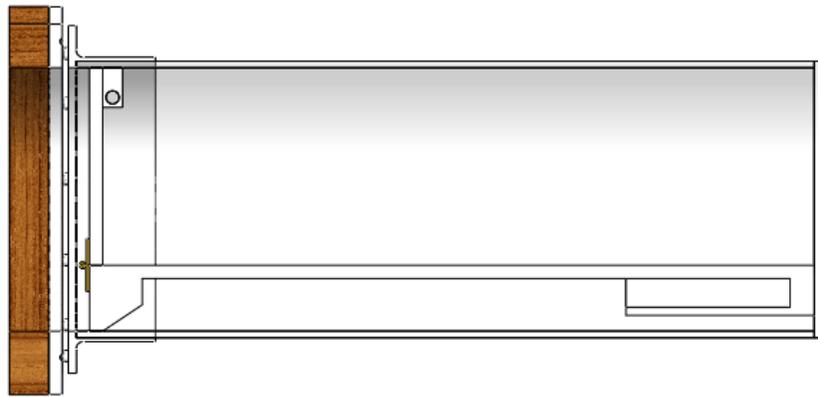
Full Sectioned Side View of the Payload Showing the Door System
